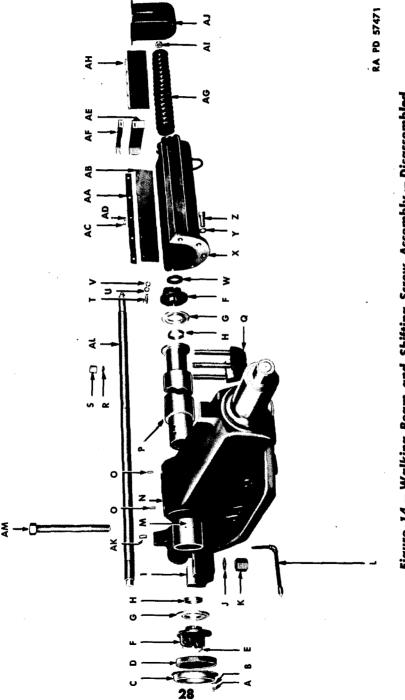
Walking Beam and Shifting Screw Assembly — Disassembled
